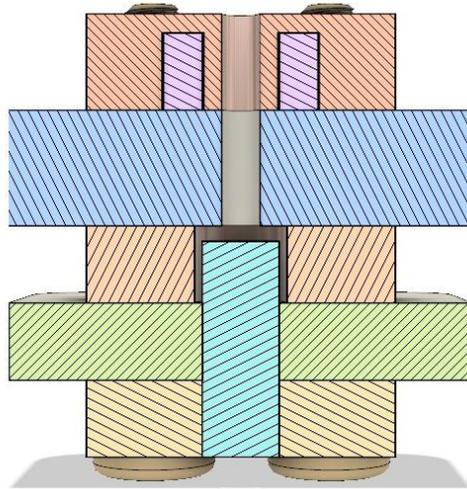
gPPT3 thruster head cross-sectional view
